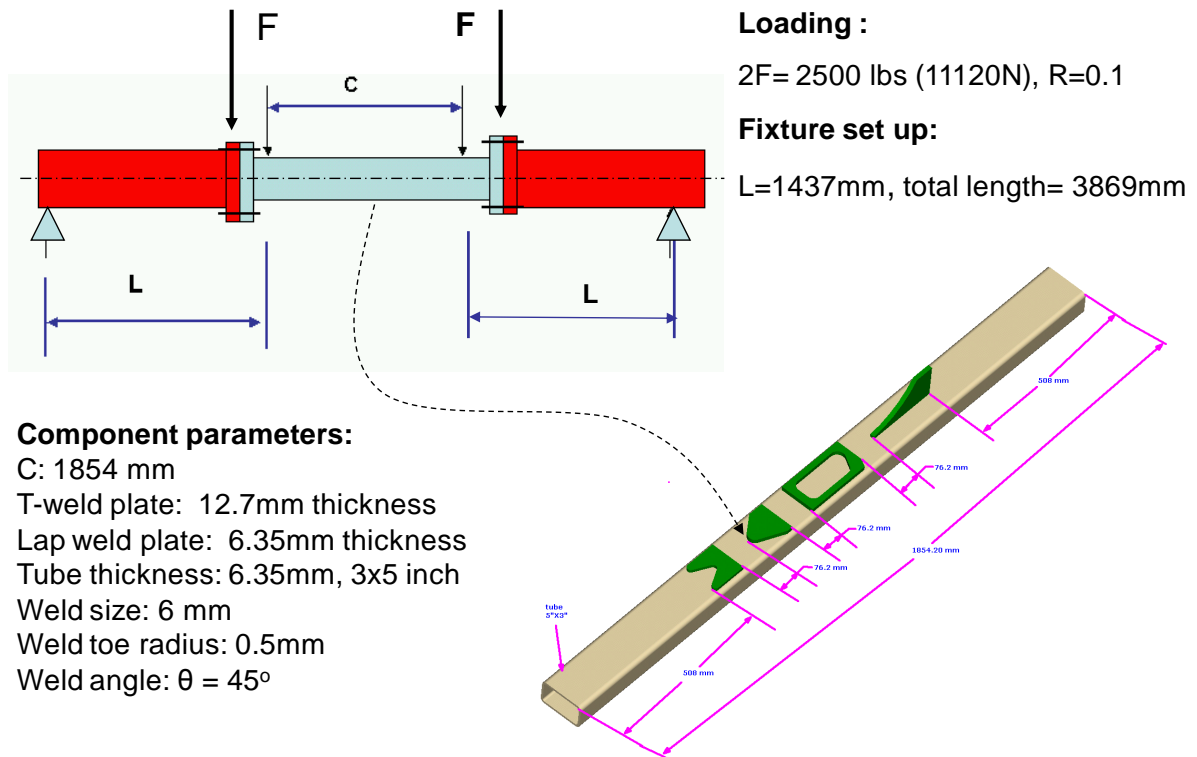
Geometry and dimensions of the beam weldment - Bending load
